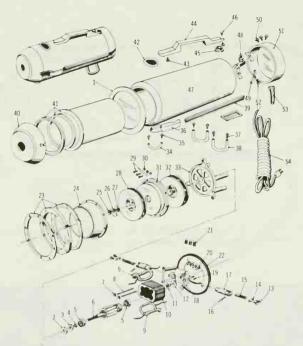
The disassembled view of a typical cylinder-type vacuum cleaner. In the illustration, 1 represents the filter assembly; 2, the bearing cap; 3, a felt washer; 4, a spring collar; 5, a ball bearing; 6, the motor armature; 7, a nut; 8, a field stud; 9, the field coil; 10, the pole piece; 11, a thrust washer; 12, a bearing cap; 13, screws; 14, a brush terminal; 15, a carbon brush and spring; 16, a cotter pin; 17, a brush halder; 18, the motor frame; 19, setscrews; 20, screws; 21, a connector; 22, the motor mounting plate and gasket assembly; 23, the support assembly; 24, the fan casing; 25, a nut; 26, the counter balance; 27, a nut; 28, the revolving fan and hub assembly; 29 and 30, screws, nuts, and washers; 31, the stationary fan assembly; 32, the revolving fan and hub; 33, the motor frame; 34, the front skid; 35, screws far skids; 36, the intake fan clamp; 37 and 38, the rear skid and attachment screws; 39, moulding; 40, the intake flange; 41, the dust bag; 42, the nameplate; 43, screws; 44, the handle; 45, the switch knob; 46, a screw; 47, the tank; 48, the switch; 49, the motor mounting segment; 50, screws; 51, the exhaust flange; 52, a screw; 53, the strain relief; 54, the cord and plug assembly; and 55, the nomenclature plate.
